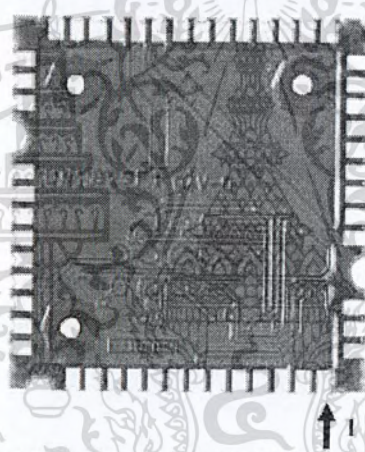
Postage stamp sized HiLoNC 51 pads out back side
